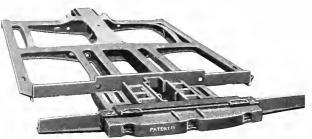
Cast Steel Combined Platform and Double Body Bolster for Steel Passenger Cars. Commonwealth Steel Co.
